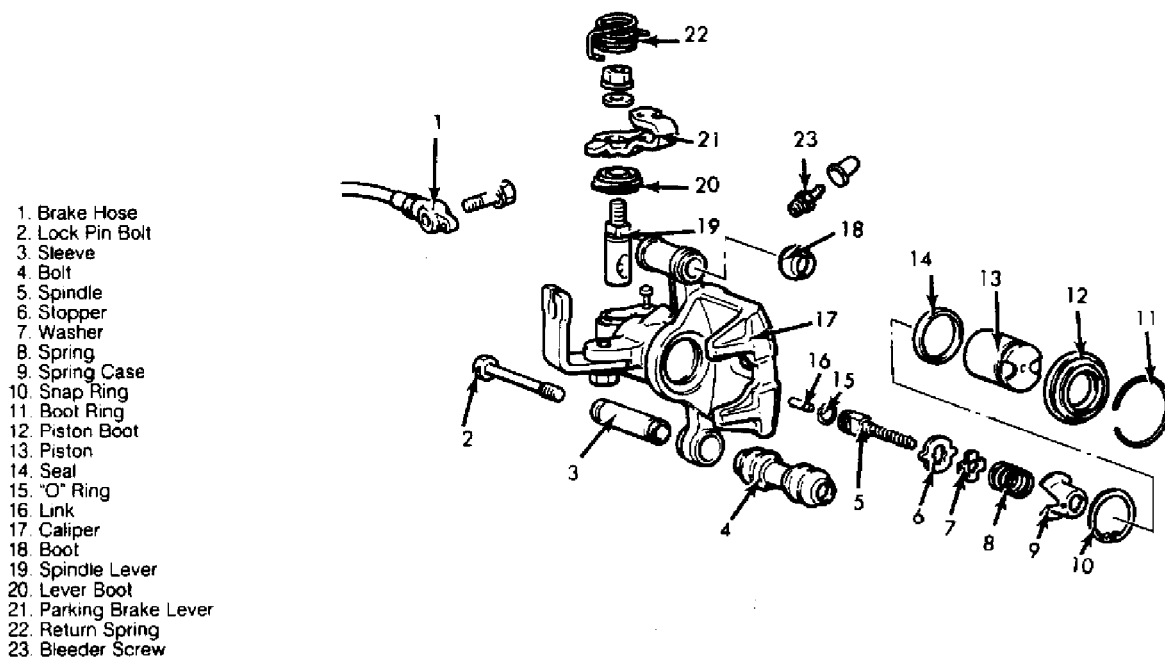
Exploded View Of Rear Disc Brake Caliper Assembly
